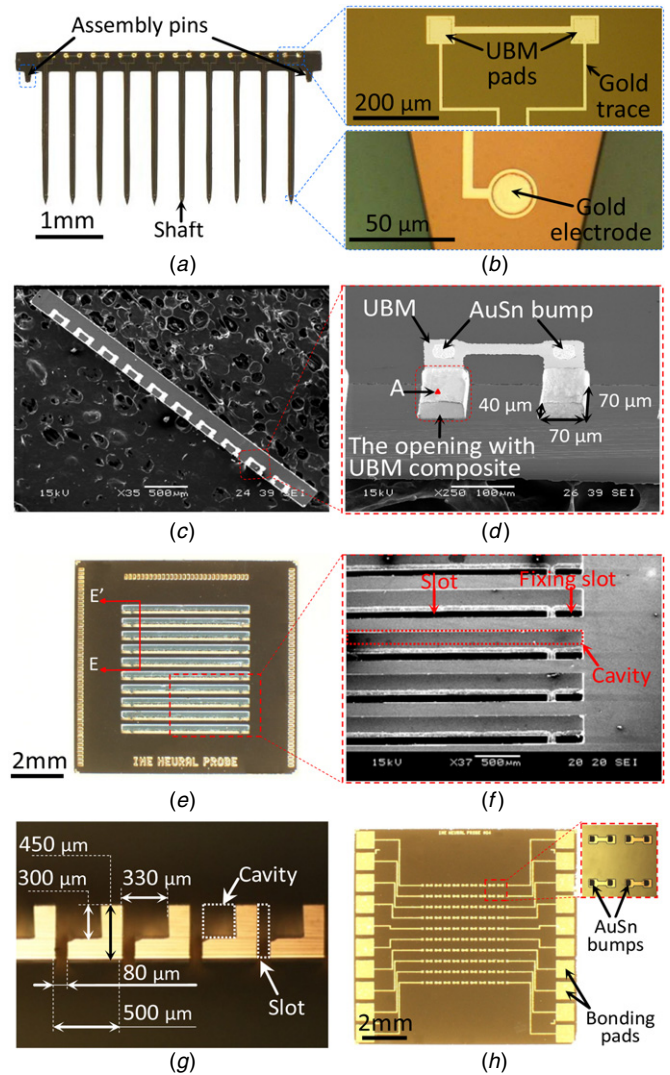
Fabrication results. (a) 2D neural probe with ten shafts. (b) Magnified views of the probe: the probe backbone (top photo) and the probe tip (bottom photo). (c) Si interposer. (d) UBM in the opening of the Si interposer. (e) Si platform. (f) Slot and cavity of the Si platform. (g) Cross section EE' of the Si platform shown in 7(e). (h) Dummy ASIC.
